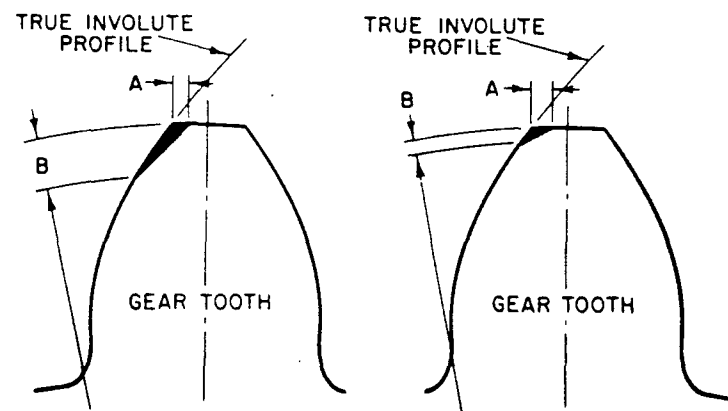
Tip Relief and Tip Chamfer on a Gear Tooth (5)
